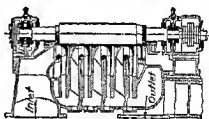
Half Section of Allis-Chalmers Single-inlet Multistage Centrifugal Compressor.
